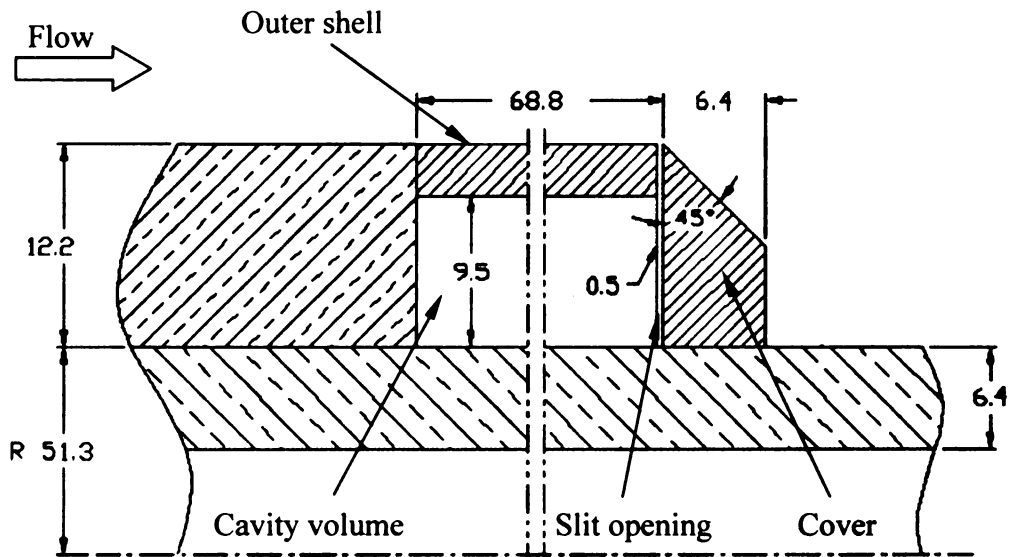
Cross section drawing of the resonator and step region (note drawing is not to scale; dimensions in mm)
